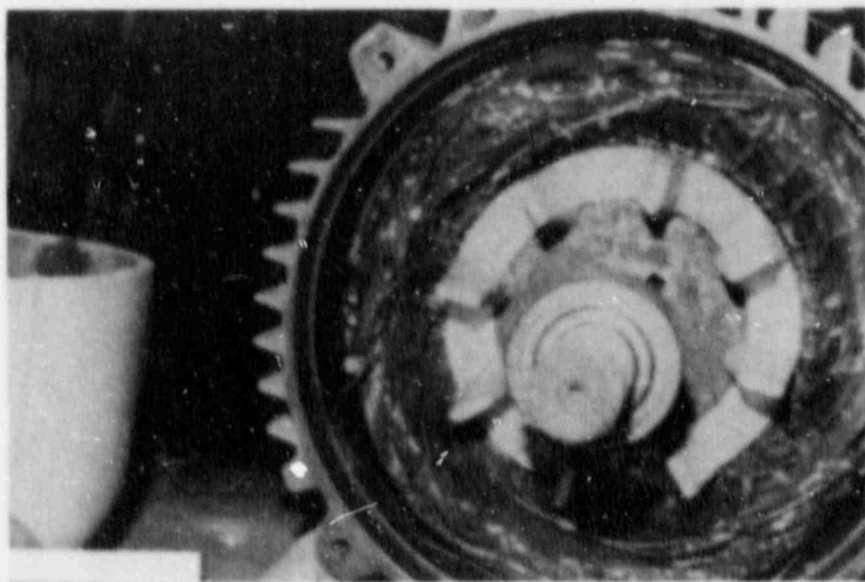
Photograph of the stator (with rotor removed) showing the thermocouples mounted on the end turn.
